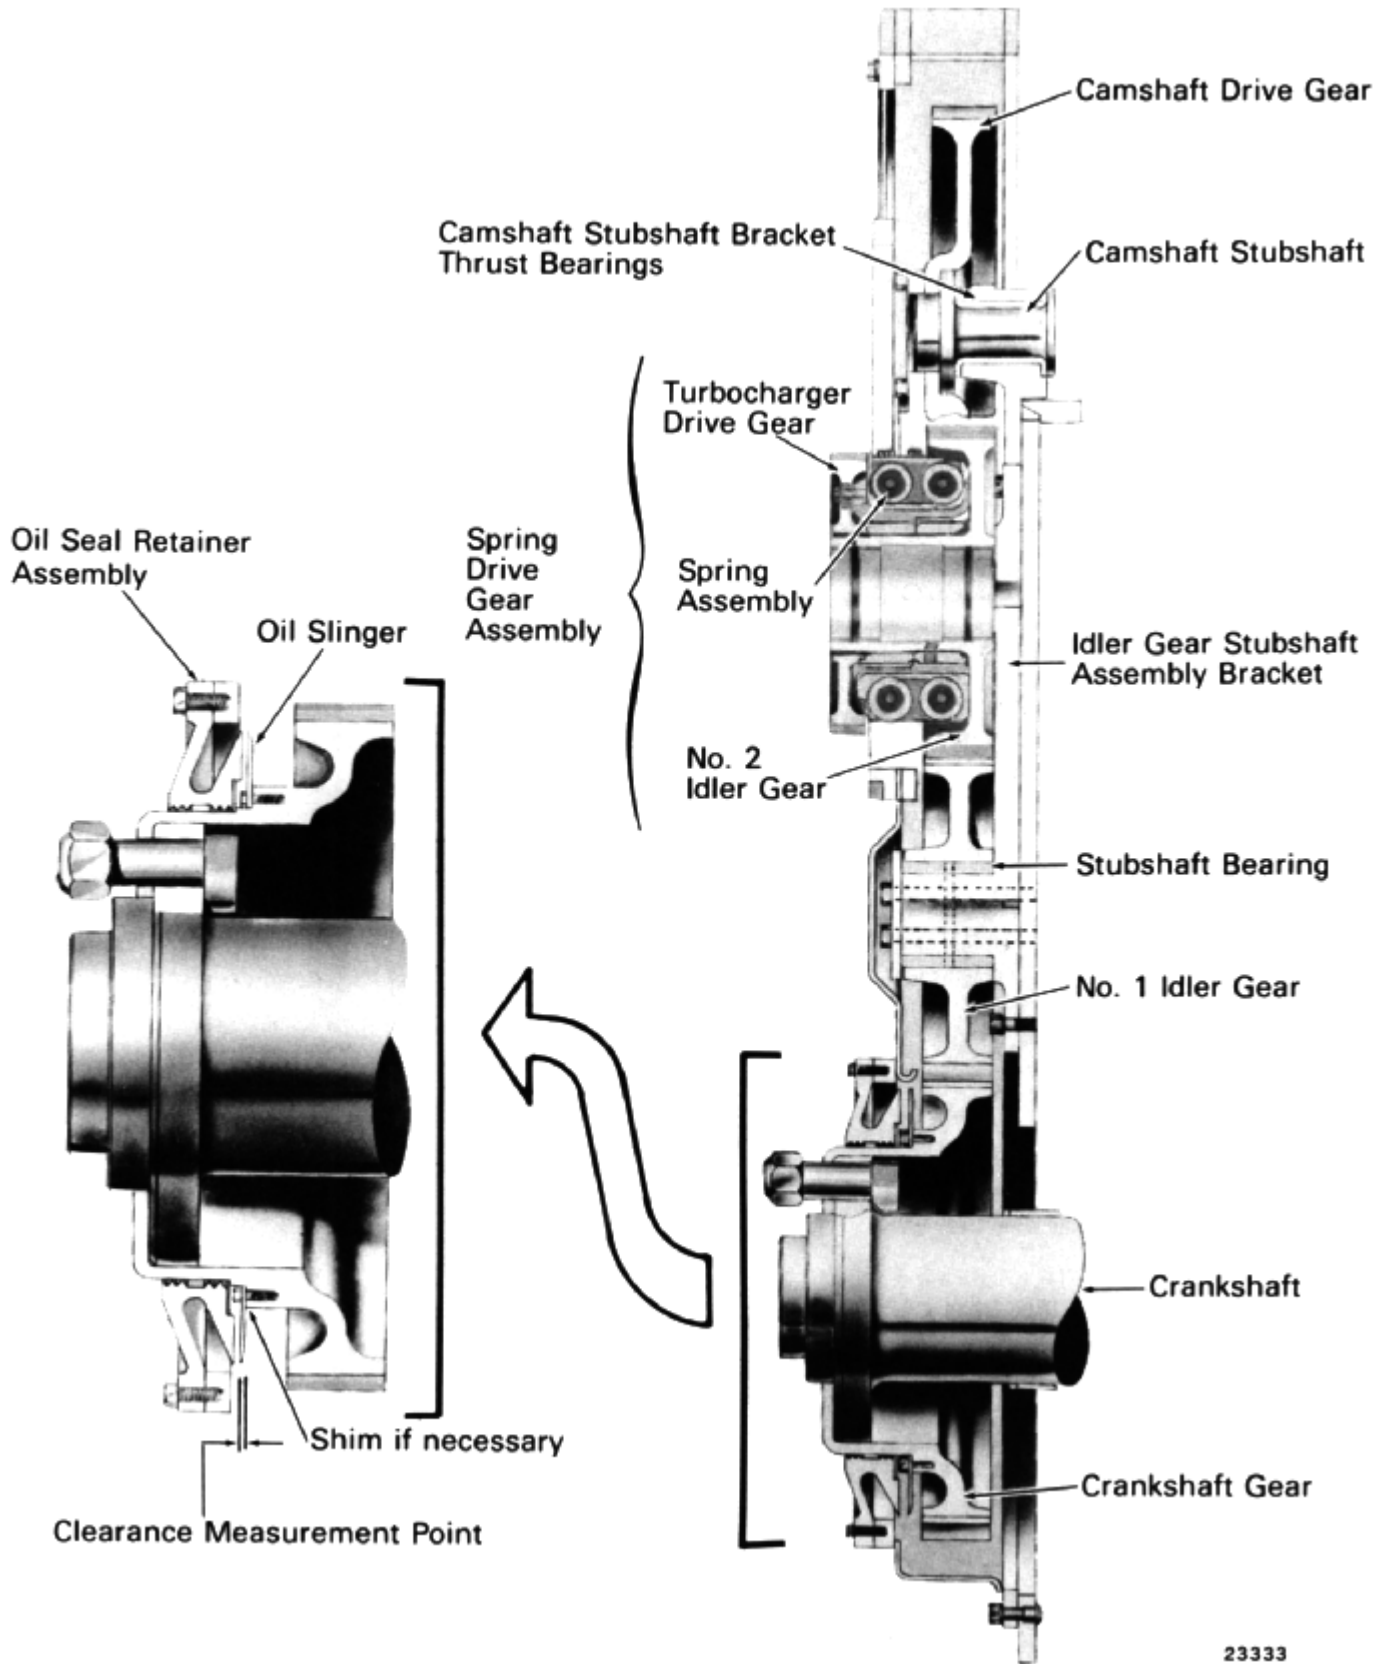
Camshaft Gear Train, Cross-Section
